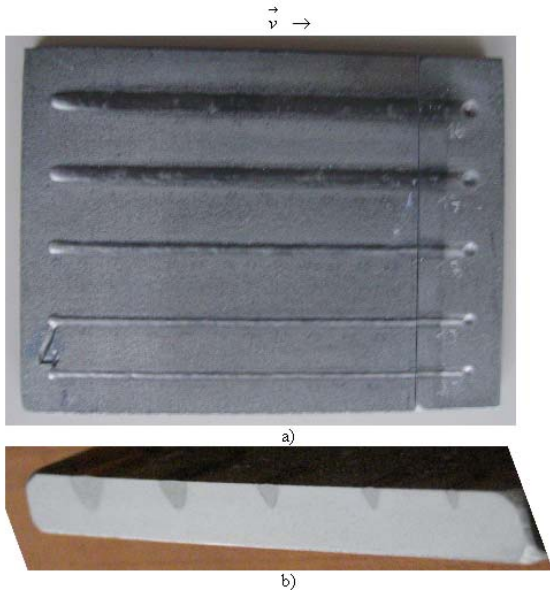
Photograph of the plate 4) Top view b) view section view, from left to right the welds: 16, 17,18,19,20
